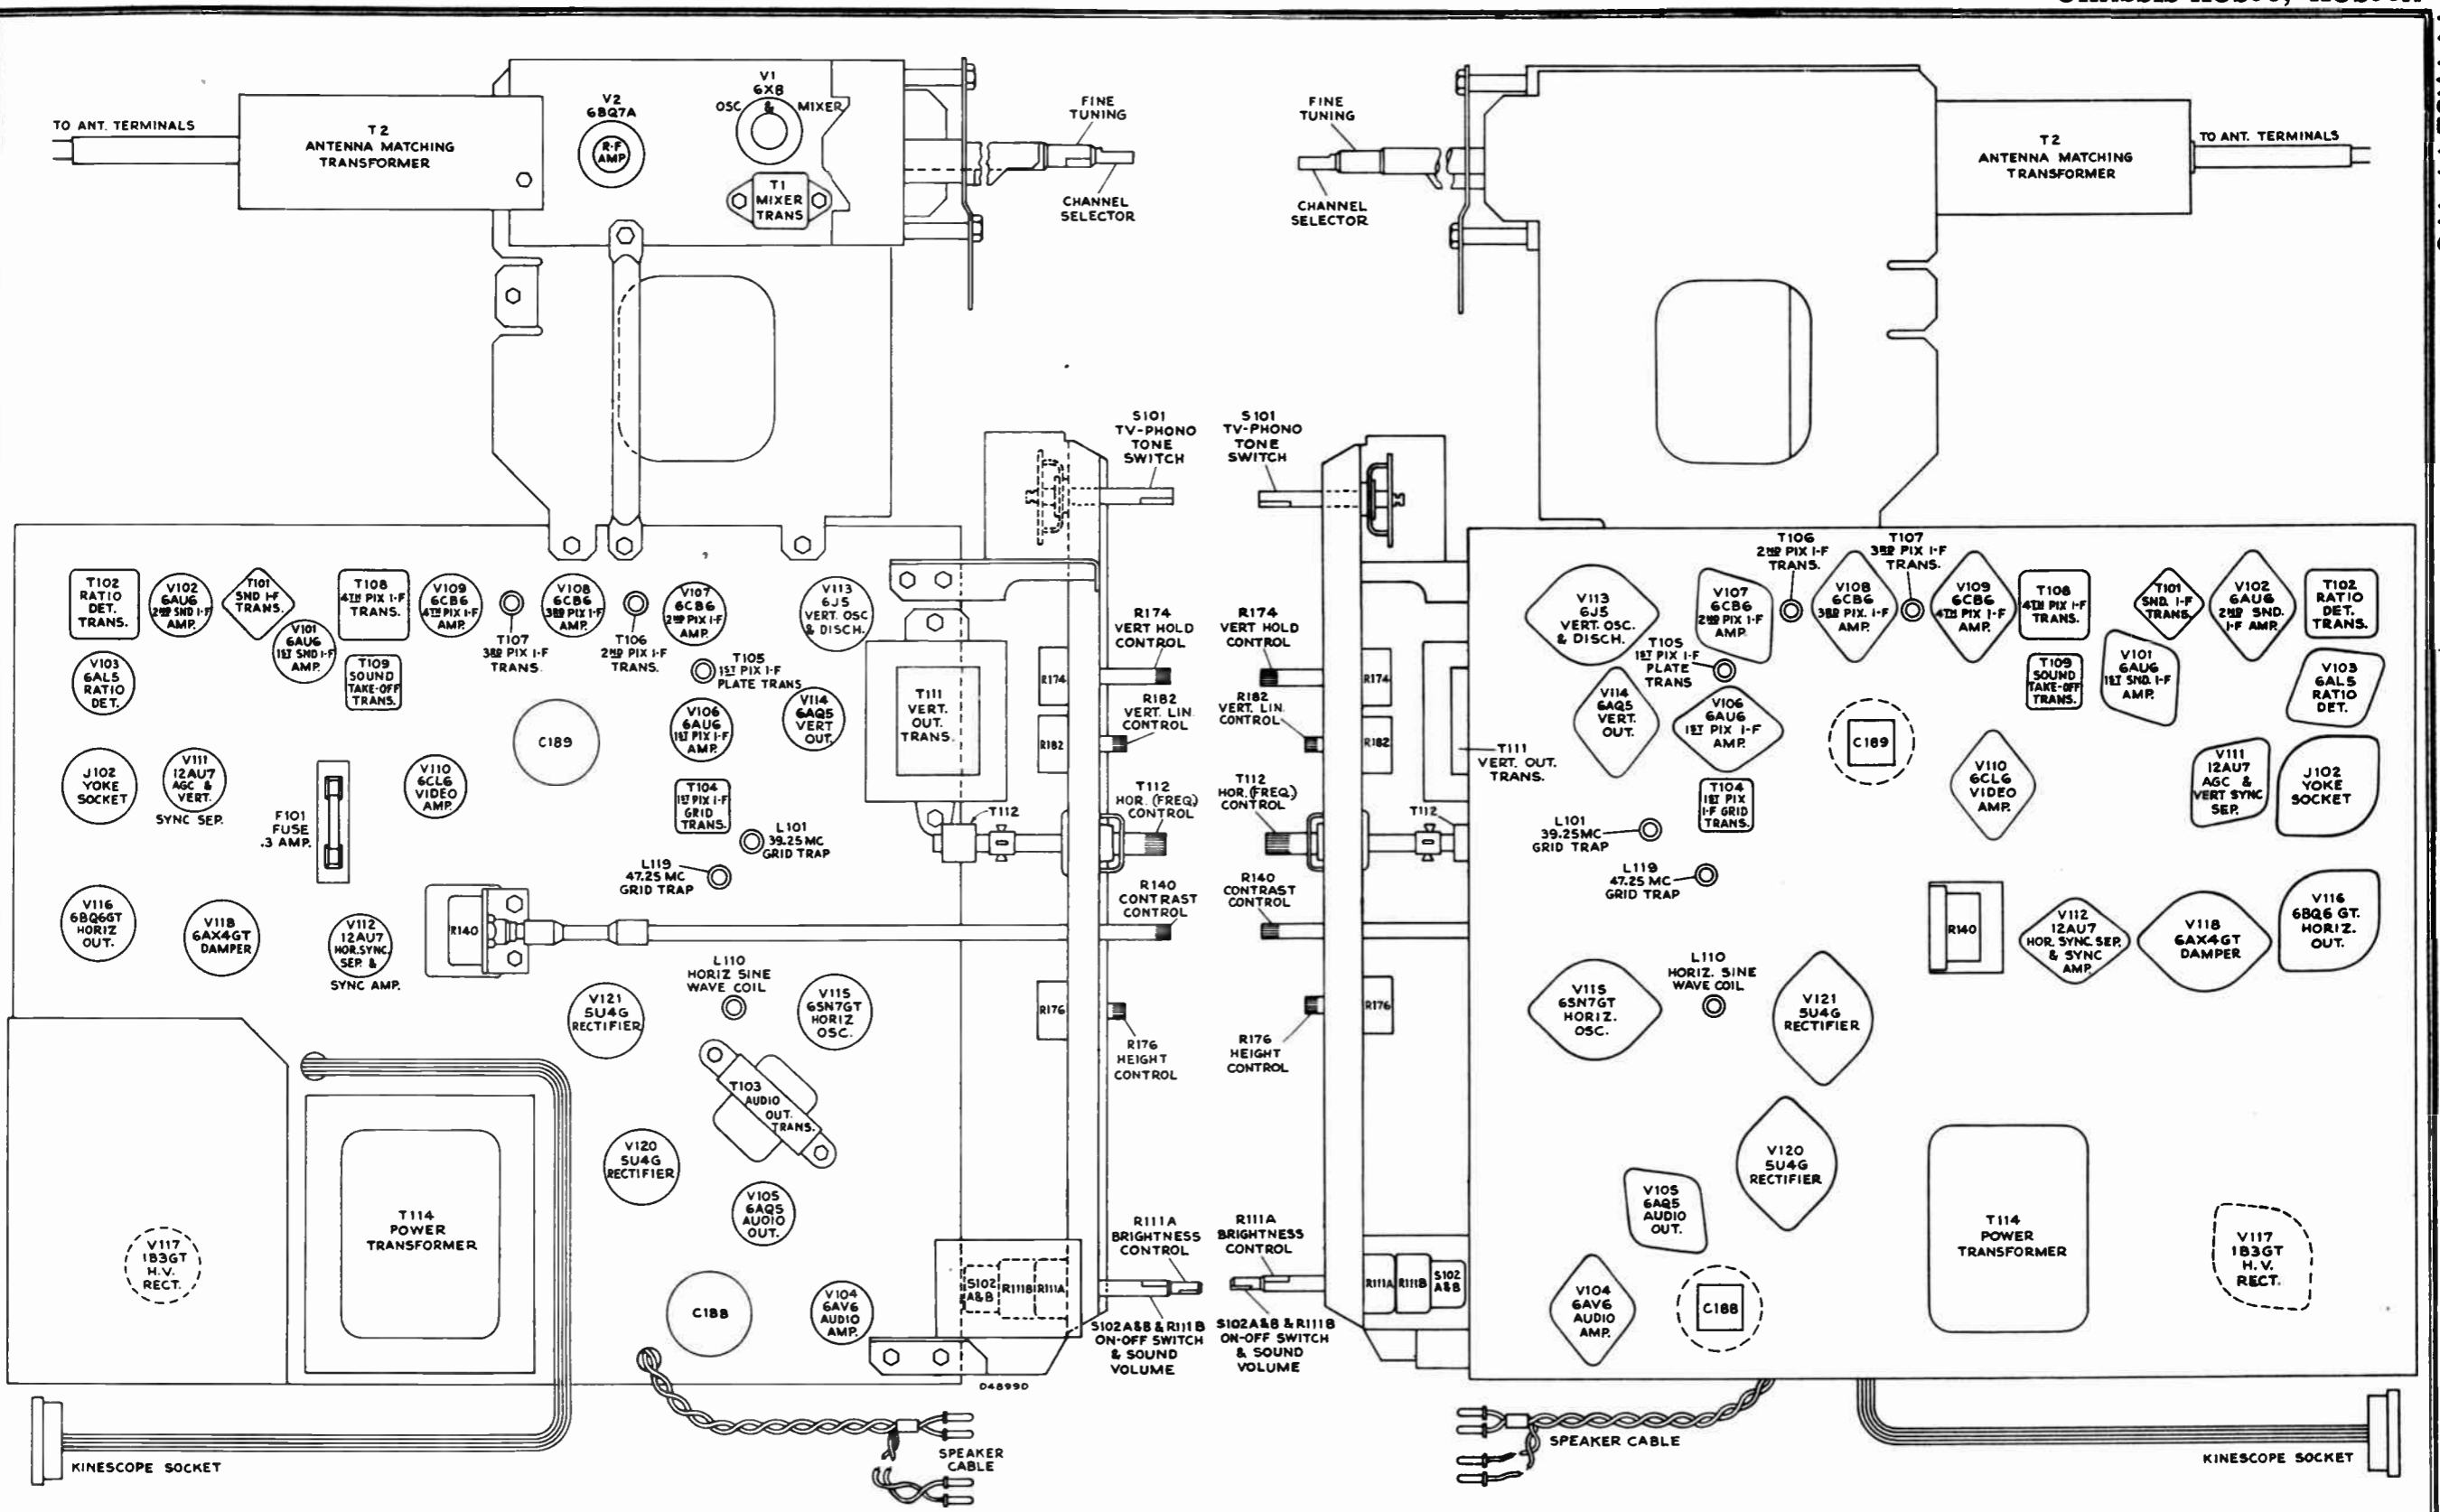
Chassis Top View (shown with KRK22D Tuner)
